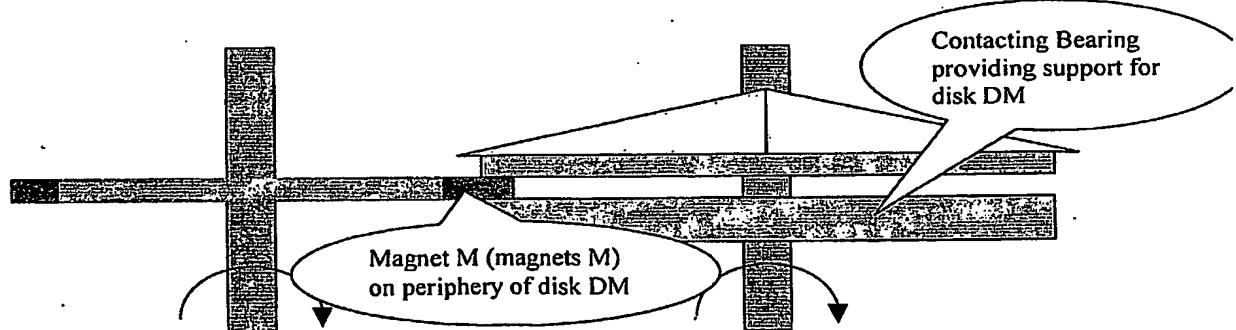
Gear Train with customizable speed-torque characteristics, with contacting bearing
